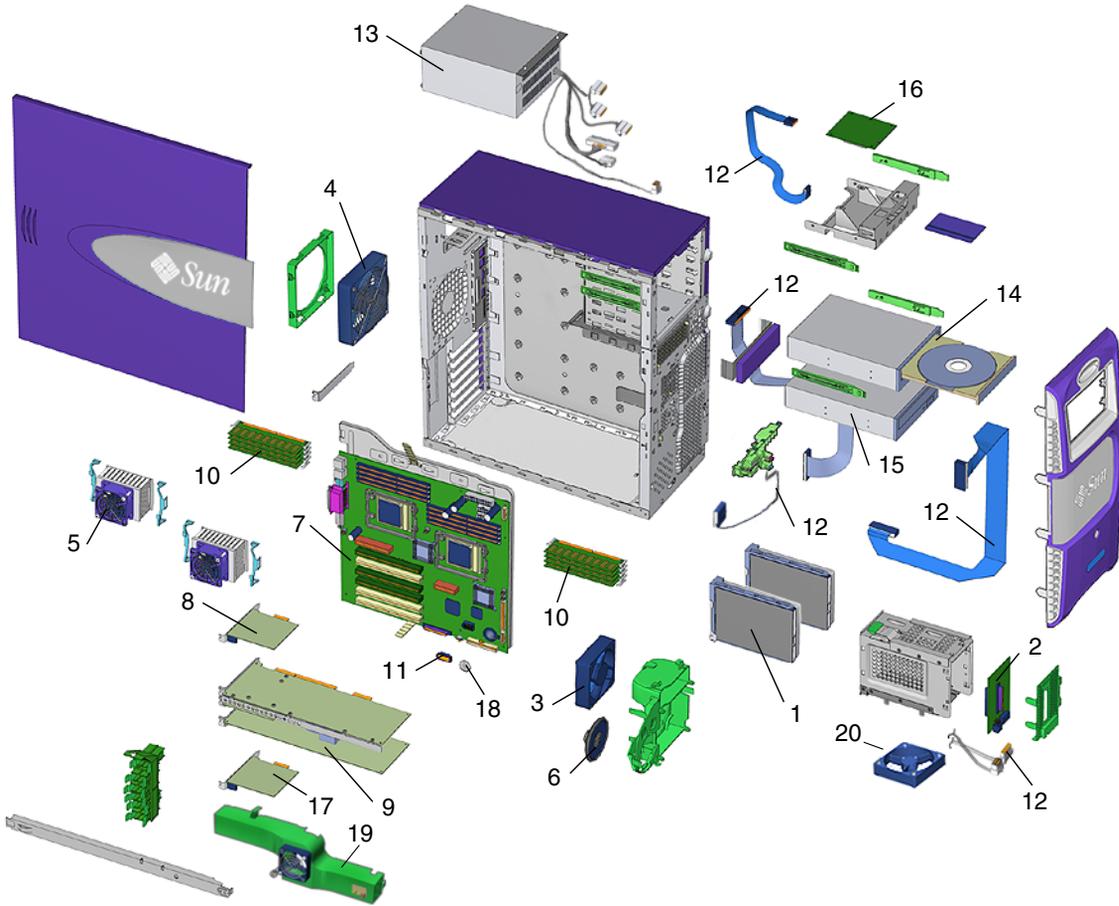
Exploded Diagram of Sun Blade 2500 Replaceable Components
